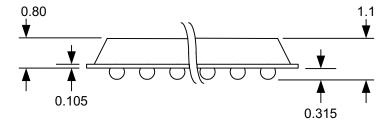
MQ-1132 BGA Package – Side View with Dimensions in Millimeters
